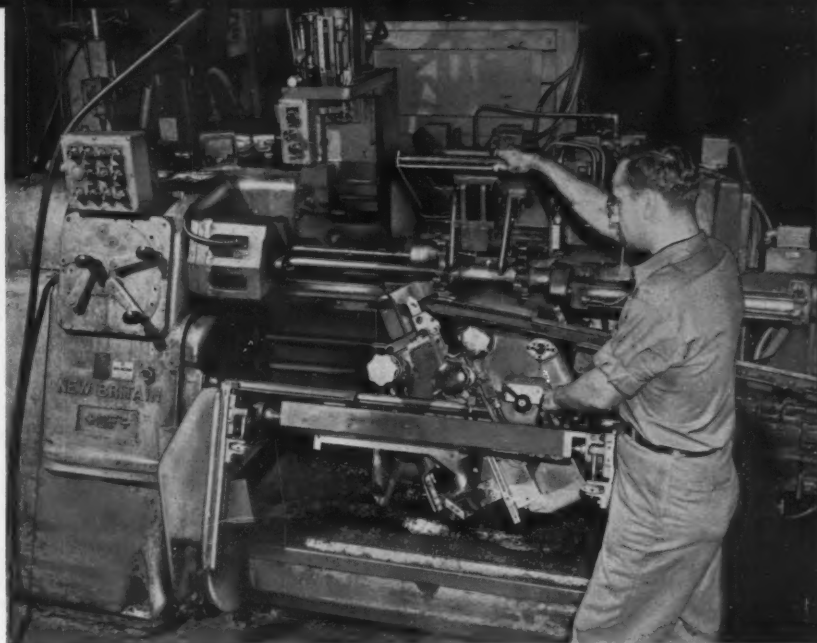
Close-up view of the lathe seen in Fig. 1. Carbide tool on rear block faces the shafts to length, while tool in front, controlled by a template, performs a profile-turning operation.
